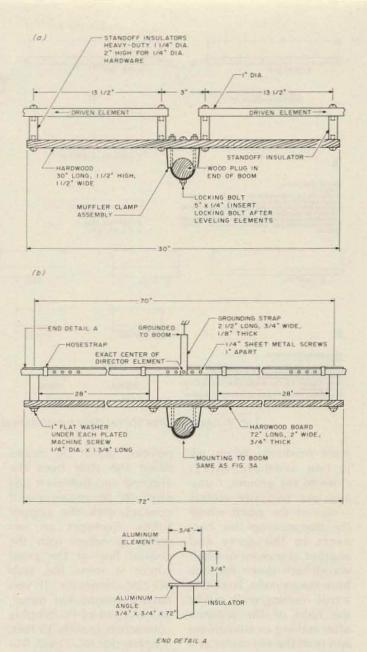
(a) Driven element mounting details. (b) Director driven element details. Detail A shows element-to-angle construction technique.
